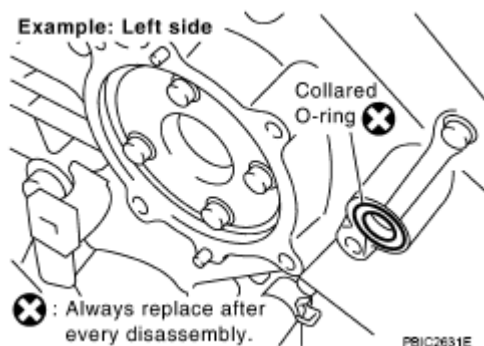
Identifying Collared O-Rings In Front Timing Chain Case Oil Hole
